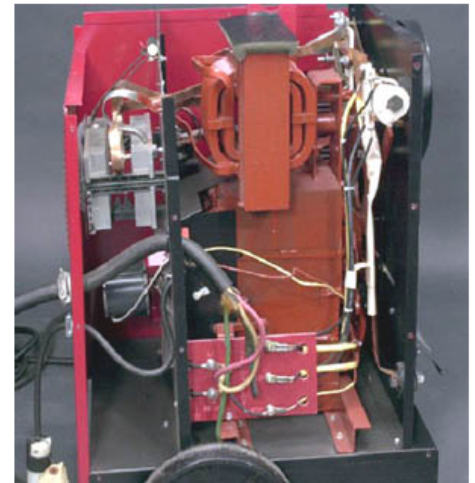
Only trained technicians should work with leads inside the welder.
